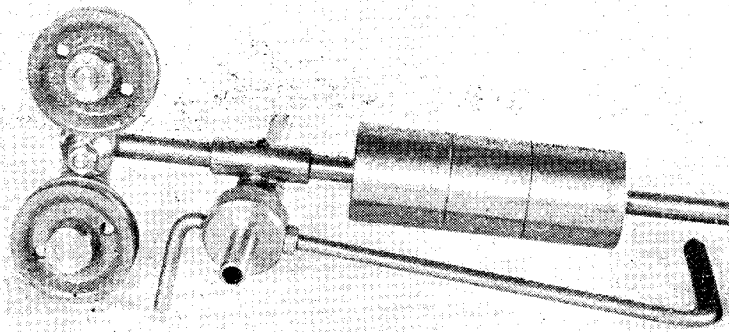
The belt-tensioning gear fitted with a stop-collar and stop-arm
